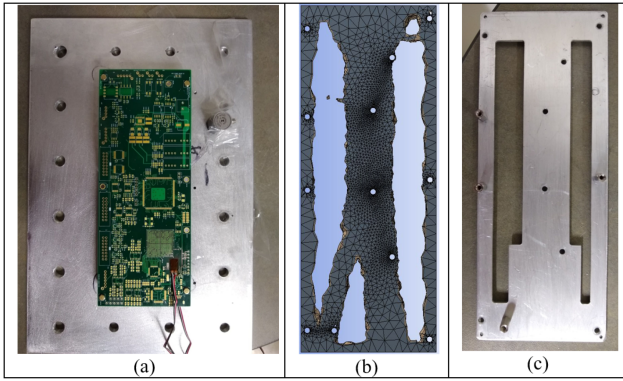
Shock and vibration analysis of (a) controller board and mounting fixture. (b) topology optimized mount. (c) as-manufactured mount for simplicity of fabrication.
